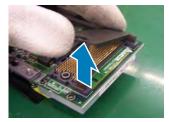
Attaching the Processor and Heat Sink to the Main Board
